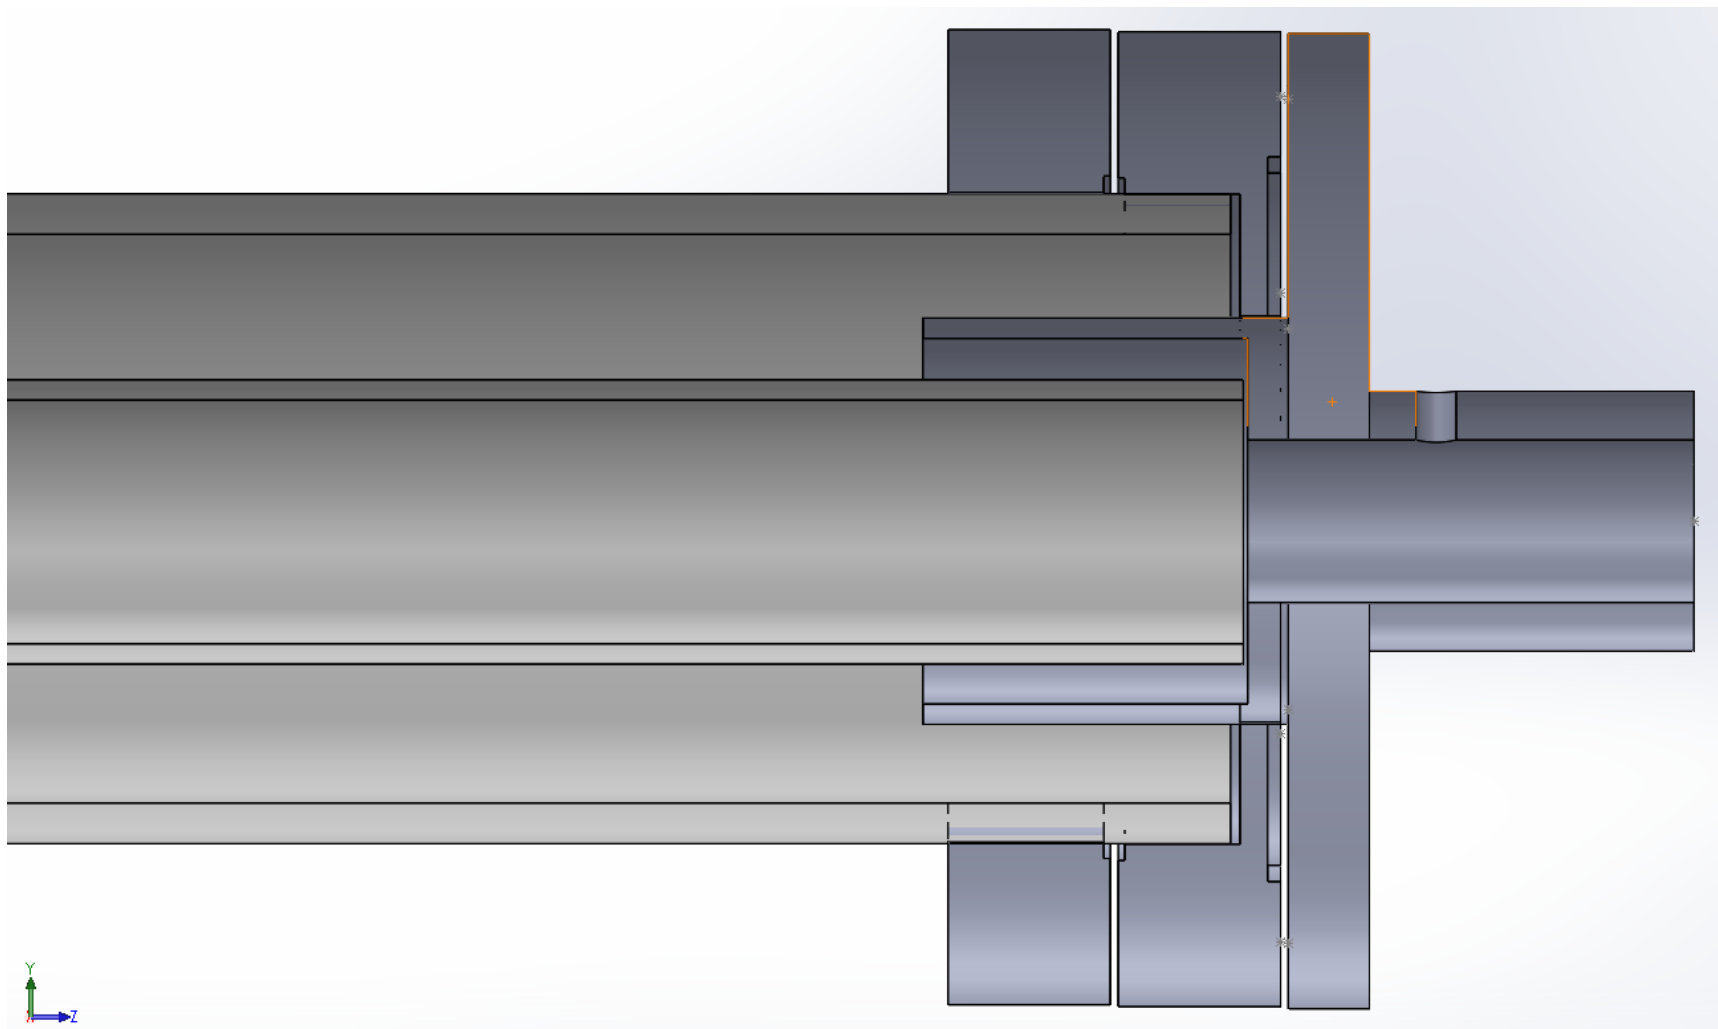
Sectioned view of one flange and the outer tube of the proposed cell. Not shown are the O-rings, windows, inner tube, bolts, epoxy for inner tube, or alumina thermocouple sheaths. Image taken from SolidWorks[®].
